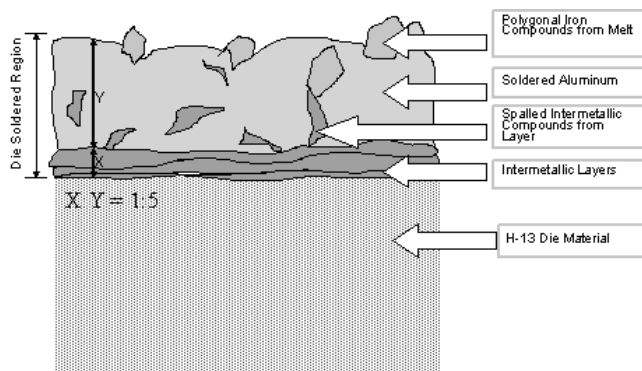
Schematic of a typical die soldering cross section, showing the intermediate layers, soldered aluminum, and spalled intermetallic floats
